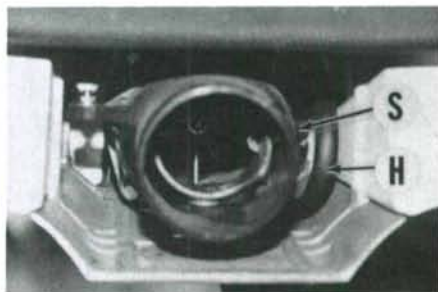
View identifies jet pump cooling system supply hose (H) and bilge siphon hose (S). Bilge siphon hose fitting is located on top jet pump steering nozzle on Model JS300SX.
